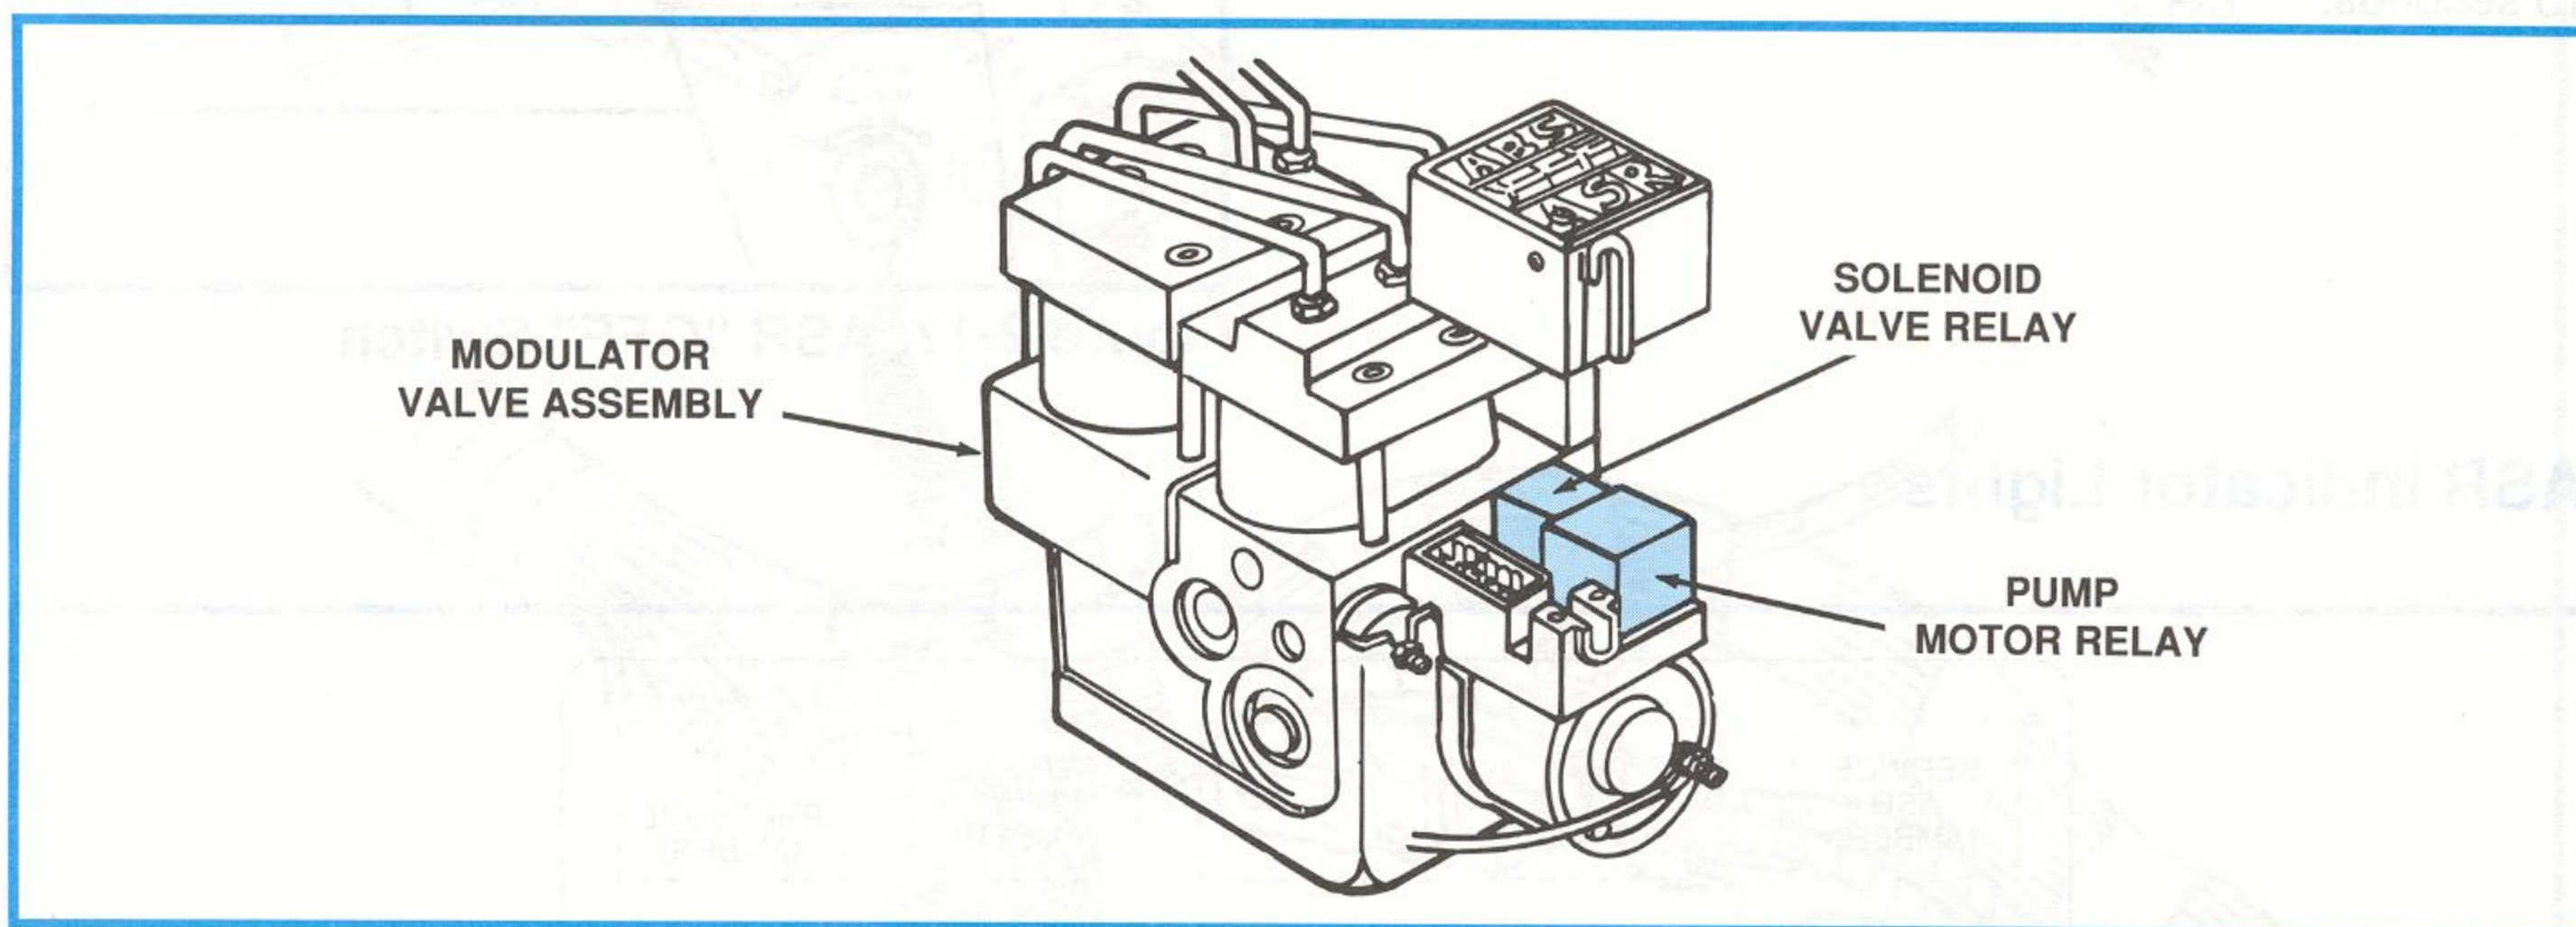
, Pump Motor Relay and Solenoid Valve Relay
